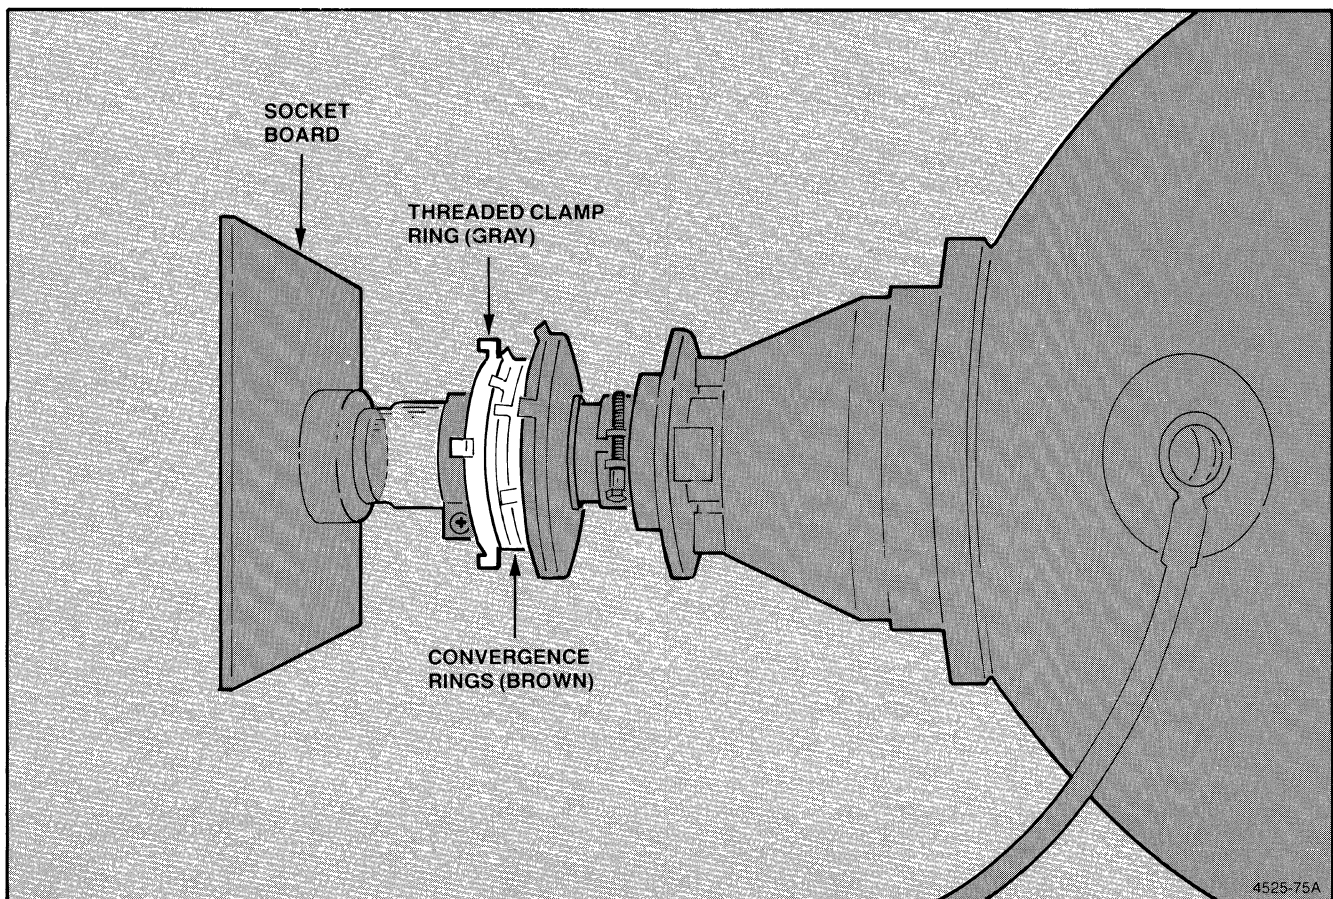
Convergence Rings and Threaded Clamp Ring.
